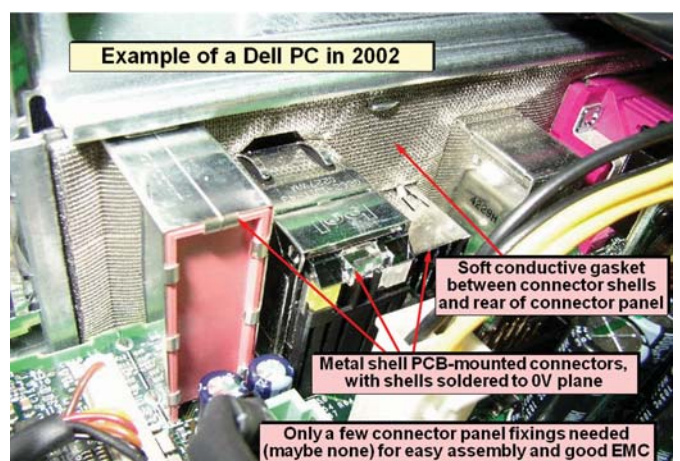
Easily making good 0V plane - chassis bonds by using conductive gaskets
